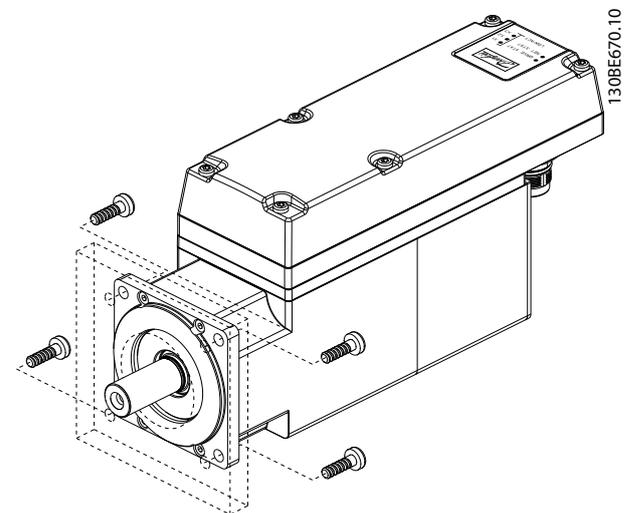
Mounting of Size 1, 1.9 Nm, Size 2, 2.9 Nm, and Size 2, 3.8 Nm Servo Drives
